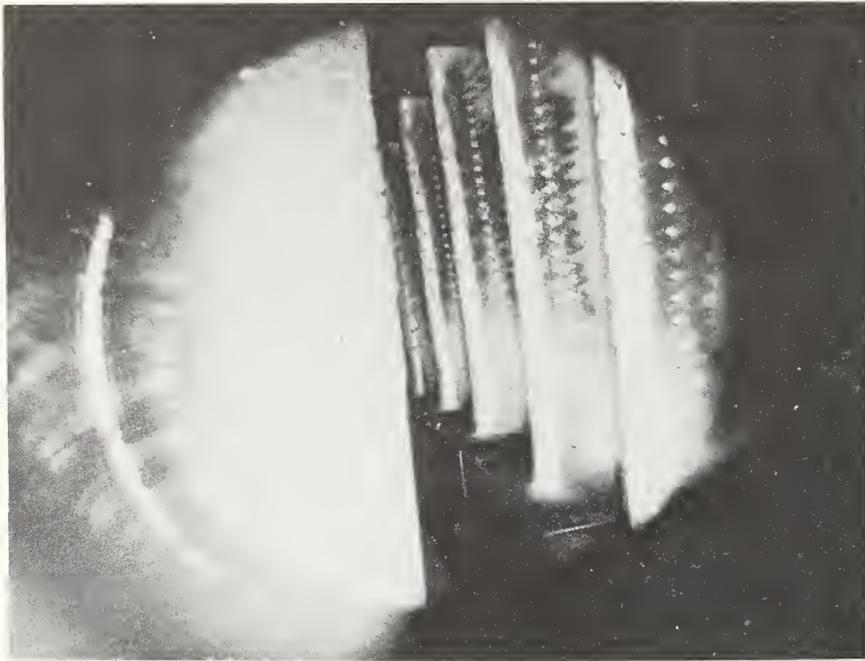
Borescope Photograph of High Pressure Turbine Blades.
